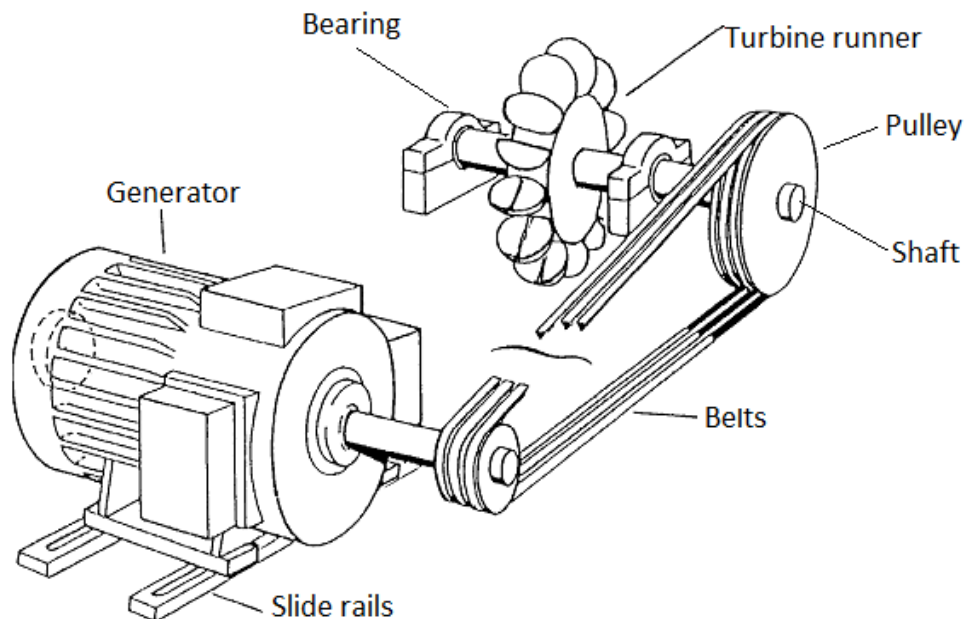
Pelton Turbine belt drive system [Adams Harvey,1999].
